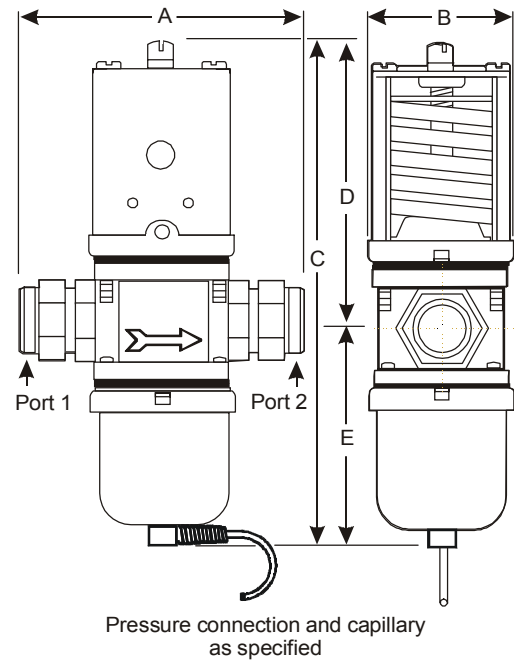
V46 Valve Dimensions For Models With Union Fittings
